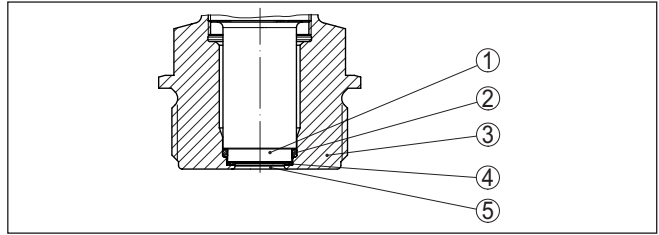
Front-flush installation of the measuring cell (example: thread G1½)
